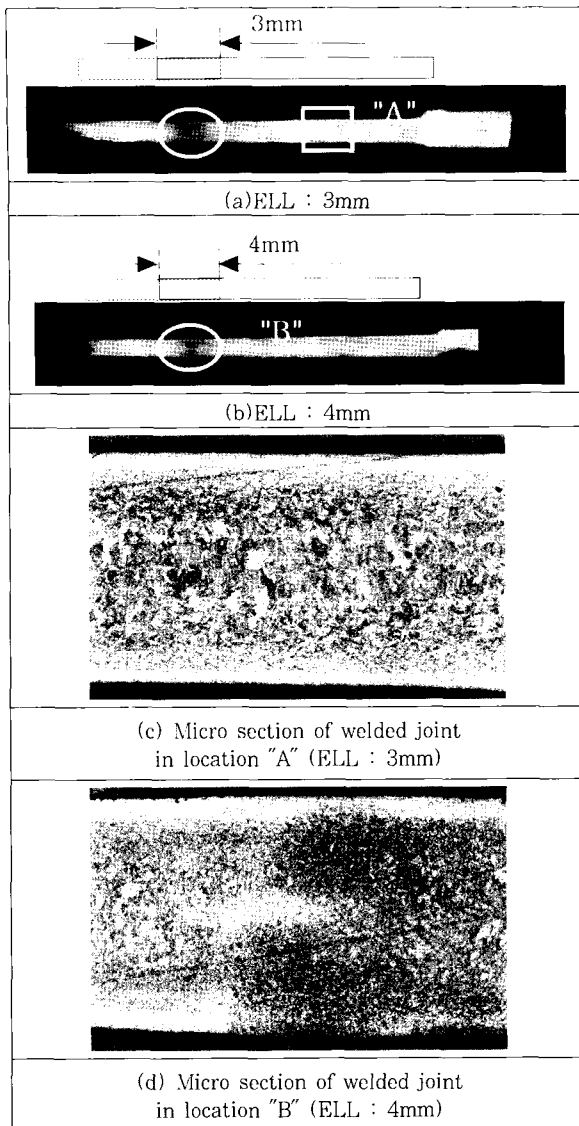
Micro and macro section of welded joint in ELL 2-point welding (13kA, 200kgf, 10 Cycle.)
